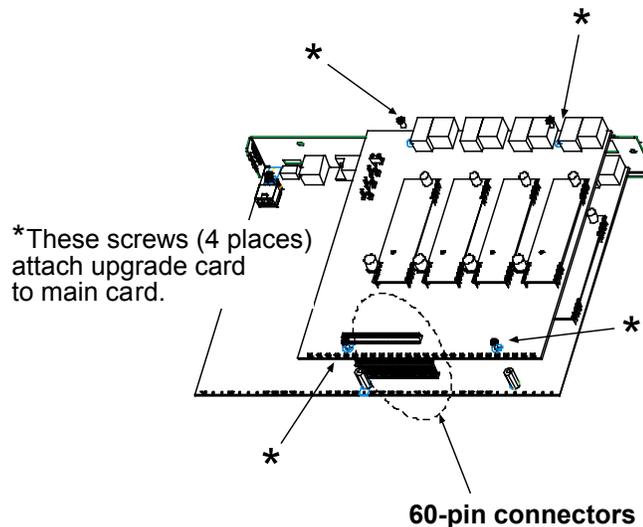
Attaching upgrade card to main circuit card (secure 4 Phillips screws; mate 60-pin connectors)
